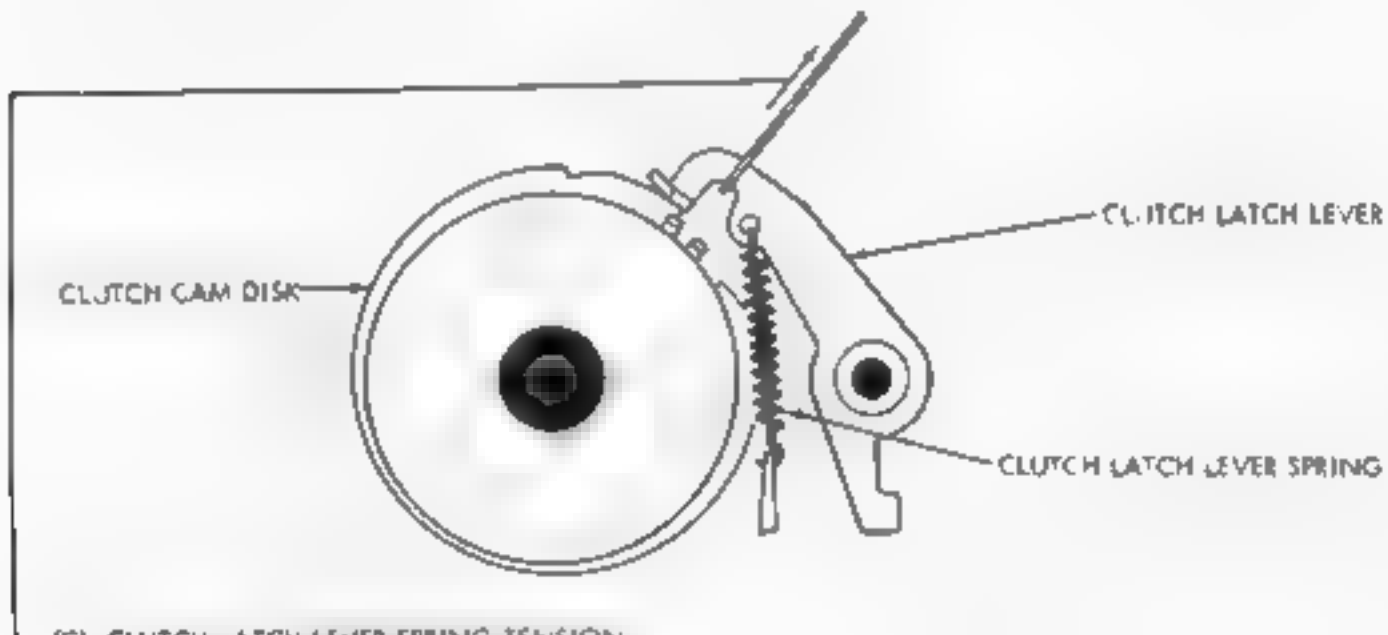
SIGNAL GENERATOR CLUTCH AND GEAR MECHANISM
